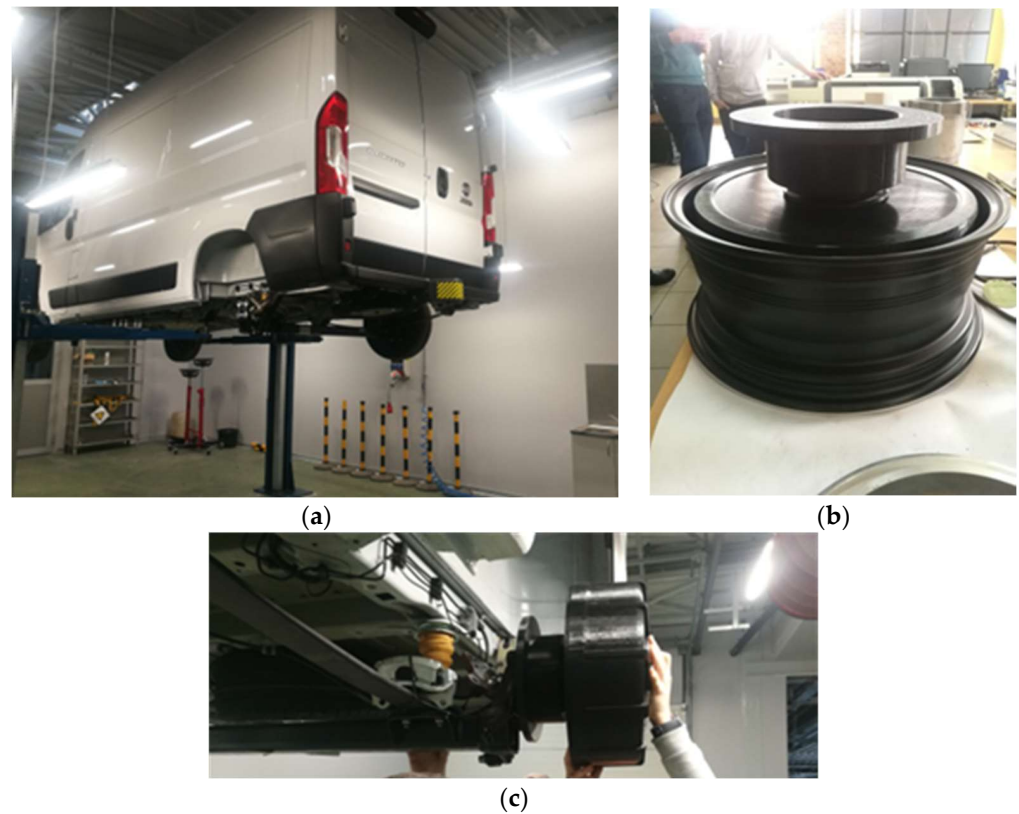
Fitting 3D printed model of motor: (a) Fiat Ducato car; (b) in the rim; (c) at the drive axle.
